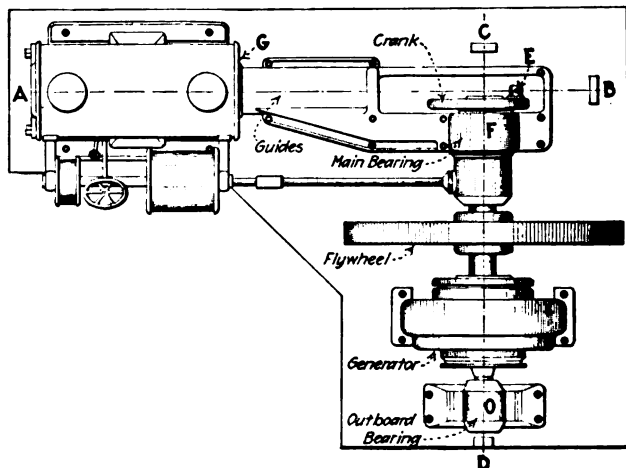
Plan lay-out of direct-connected simple engine with outboard bearing.
